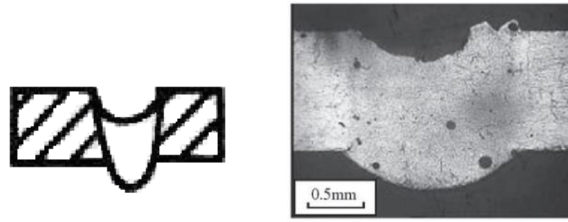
Defects of the welding profile (drop out) [116, 141]
